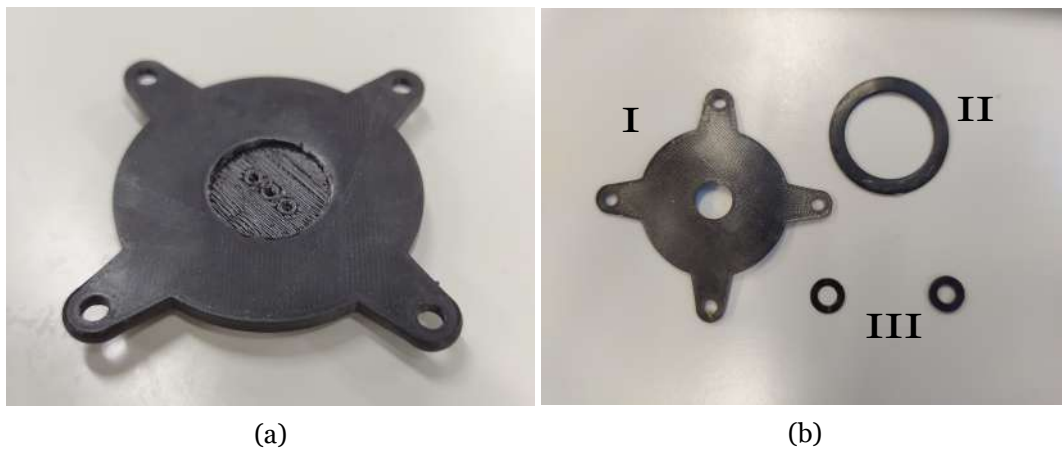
Parts fabricated with FilaFlexible40. a) Droplet generator inferior lid part; b) O-rings.
